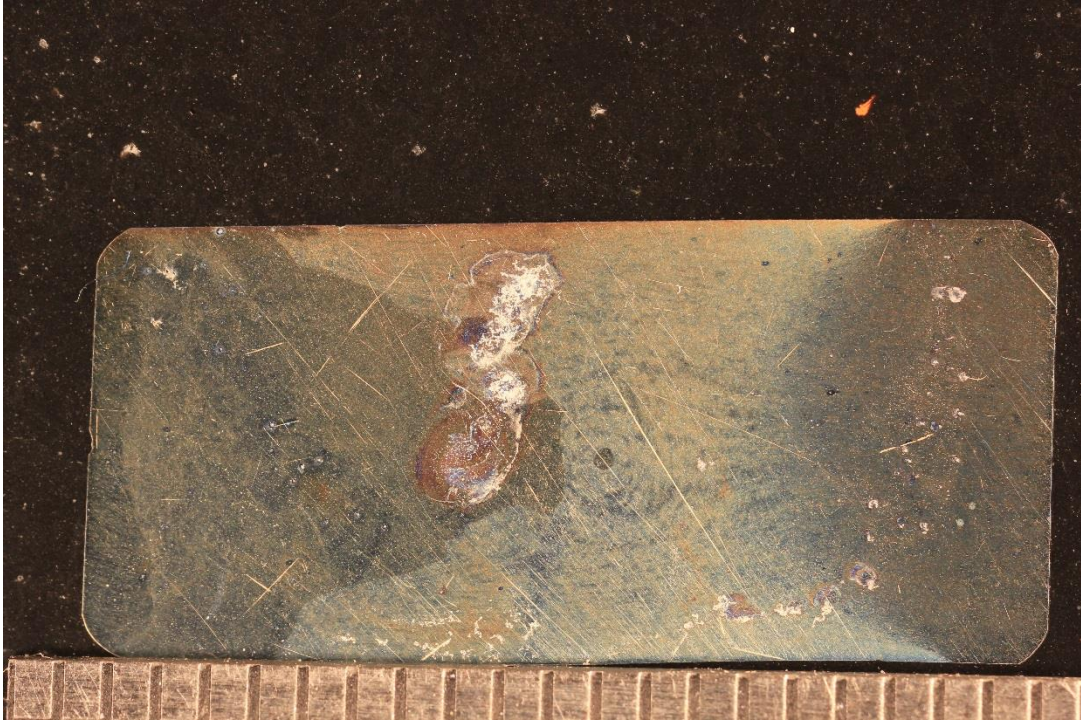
Macrograph of Weld 2 Sample 9
